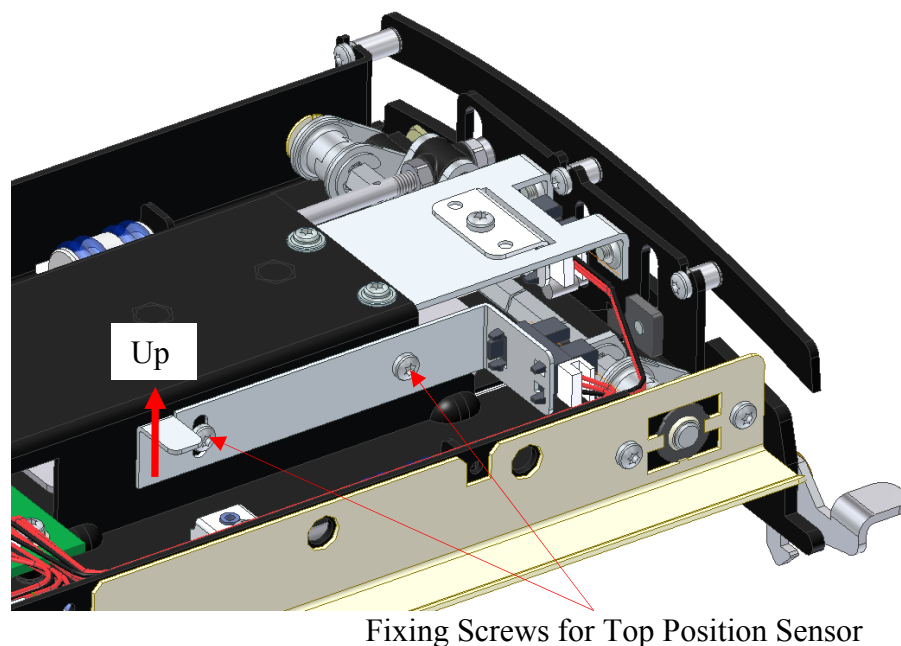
, Adjustment of Top Position Sensor (Type 2)
